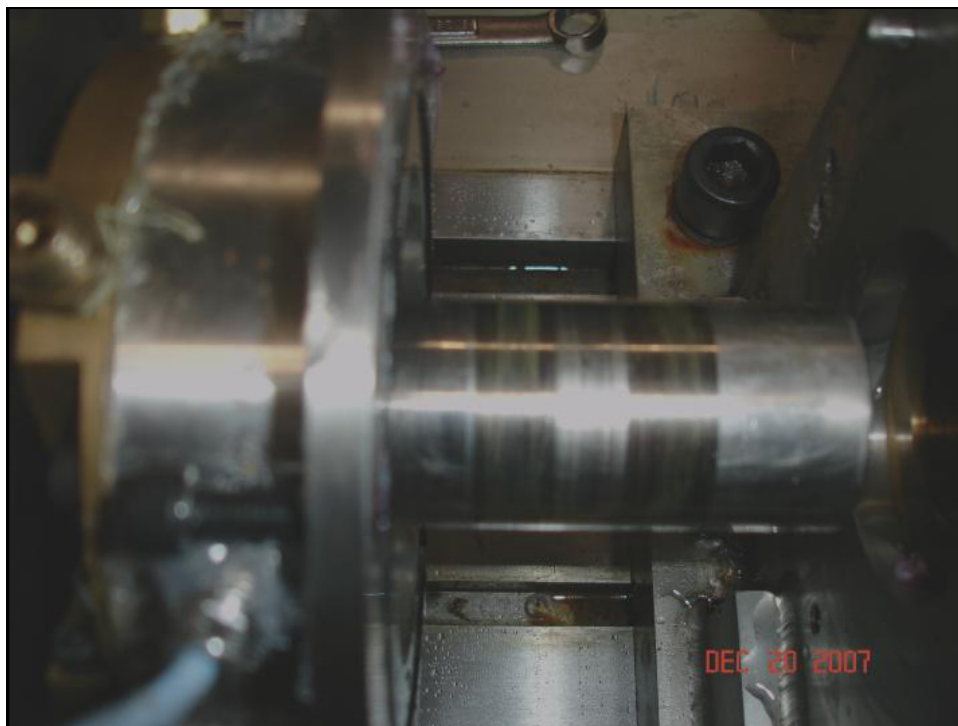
Burnishing of the rotor observed after testing by Borchard [5]
